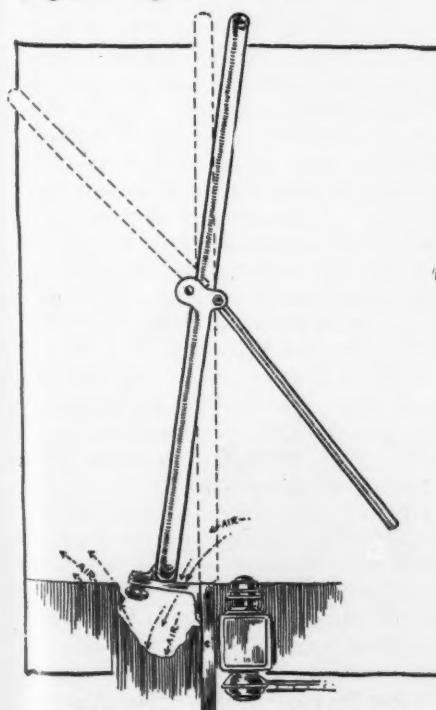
SPRAGUE WINDSHIELD VENTILATOR
